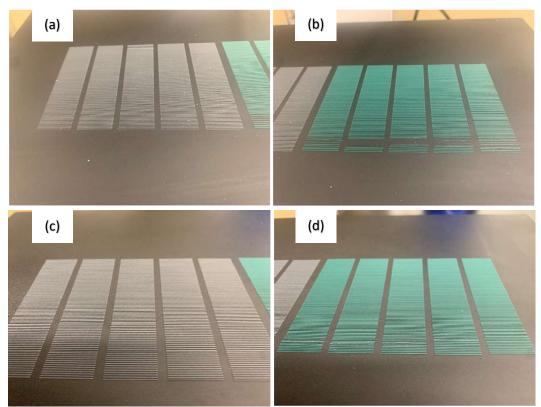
Printer Jet Correction: (a) Initial Support jet; (b) Initial Wax jets; (c) Final Support jet test; Final Wax jet Test
